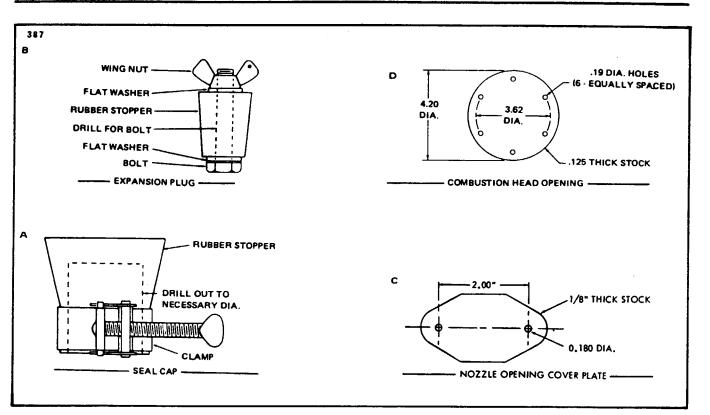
Suggested Design for Seal Plate, Plugs and Caps for Combustion Tube Leakage Test
